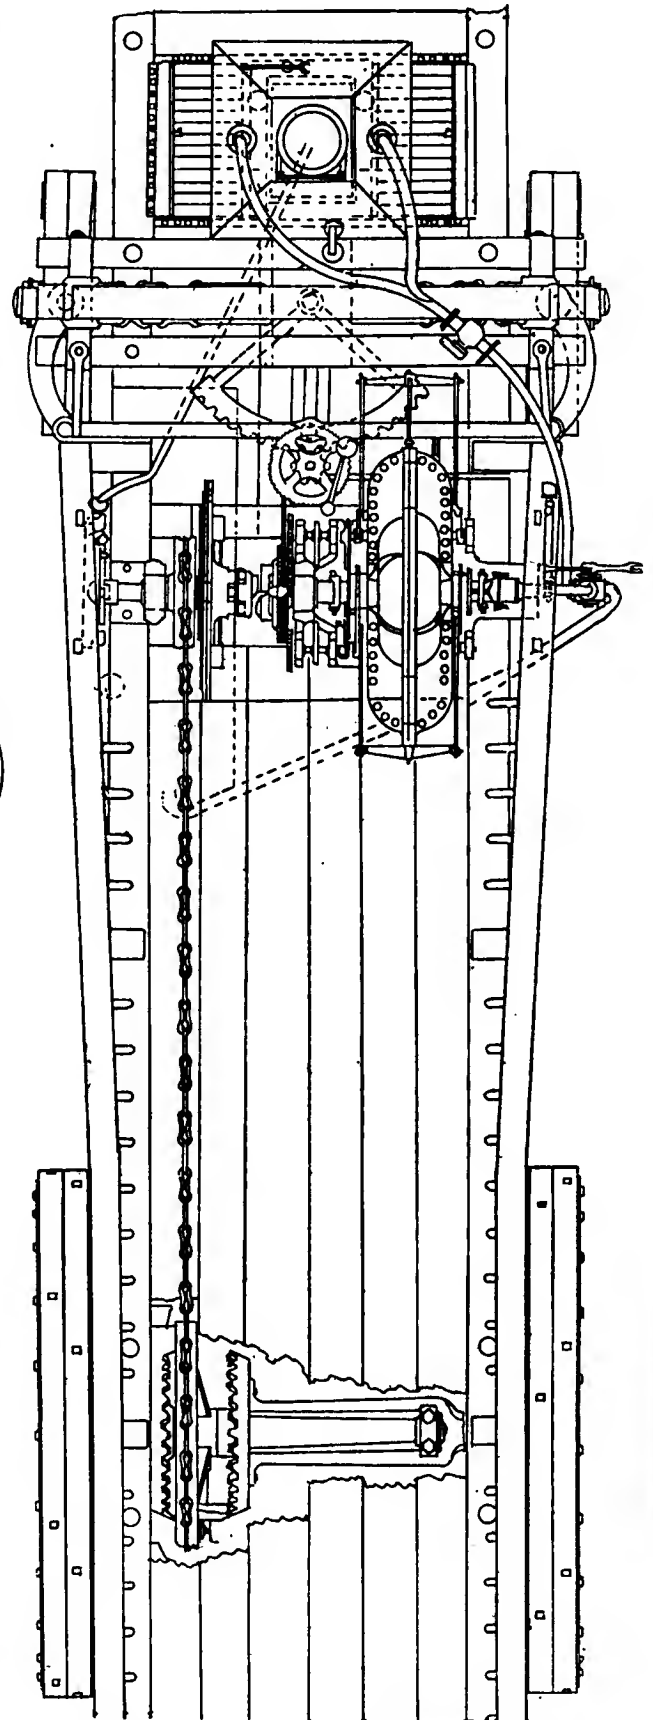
Plan view of Pecqueur steam car, 1828, which merits being known as the father of the modern automobile in that it employed for the first time the modern steering gear, a two-speed planetary gearset, and a divided rear axle carrying a modern type of differential
